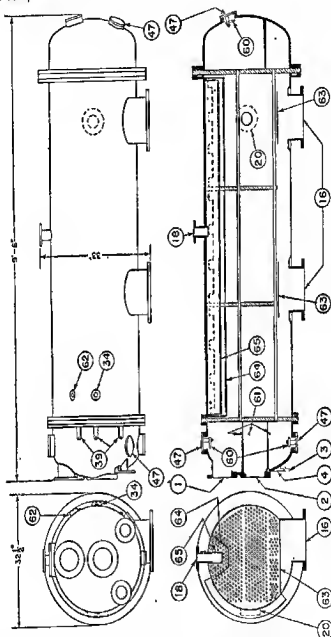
Condenser for double-effect system. (Courtesy of Foster Wheeler Corporation.)
